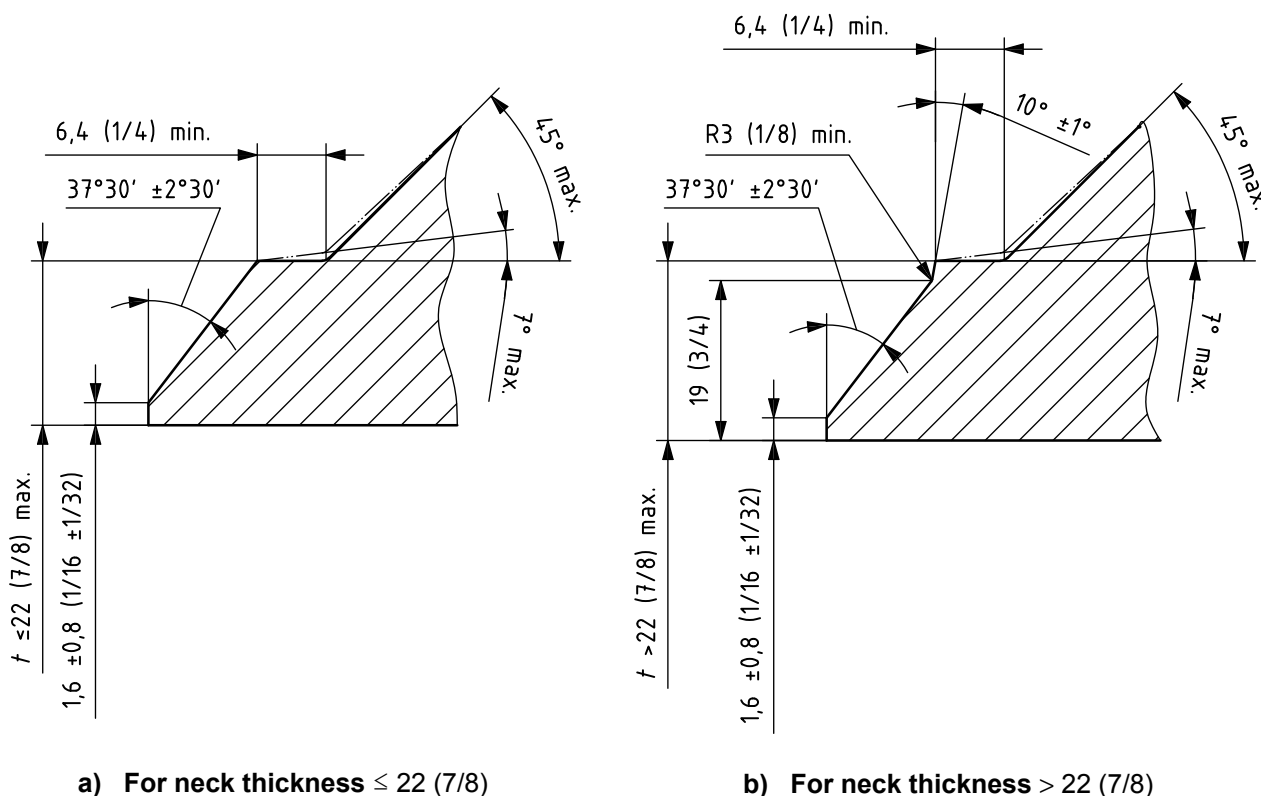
Weld end preparation for types 17SS and 17SV welding neck flanges
